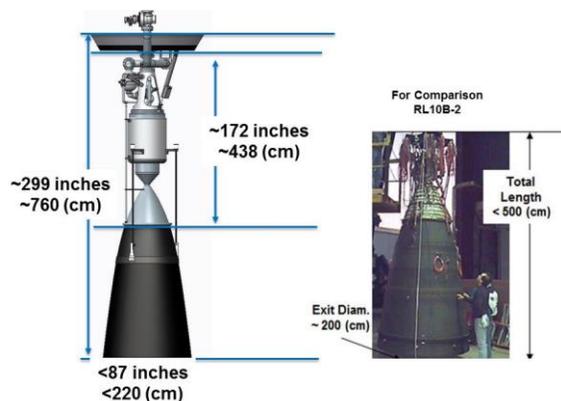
Example LEU NTP Engine System Configuration with Single Turbopump.
